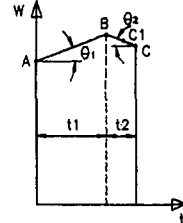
Configuration of grinding wheel for manufacturing end mill
